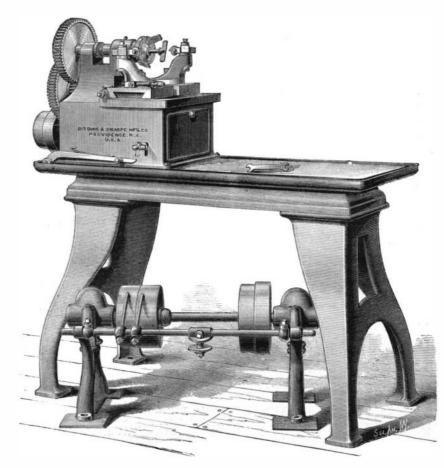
AUTOMATIC BALANCE WHEEL TURNING MACHINE.
